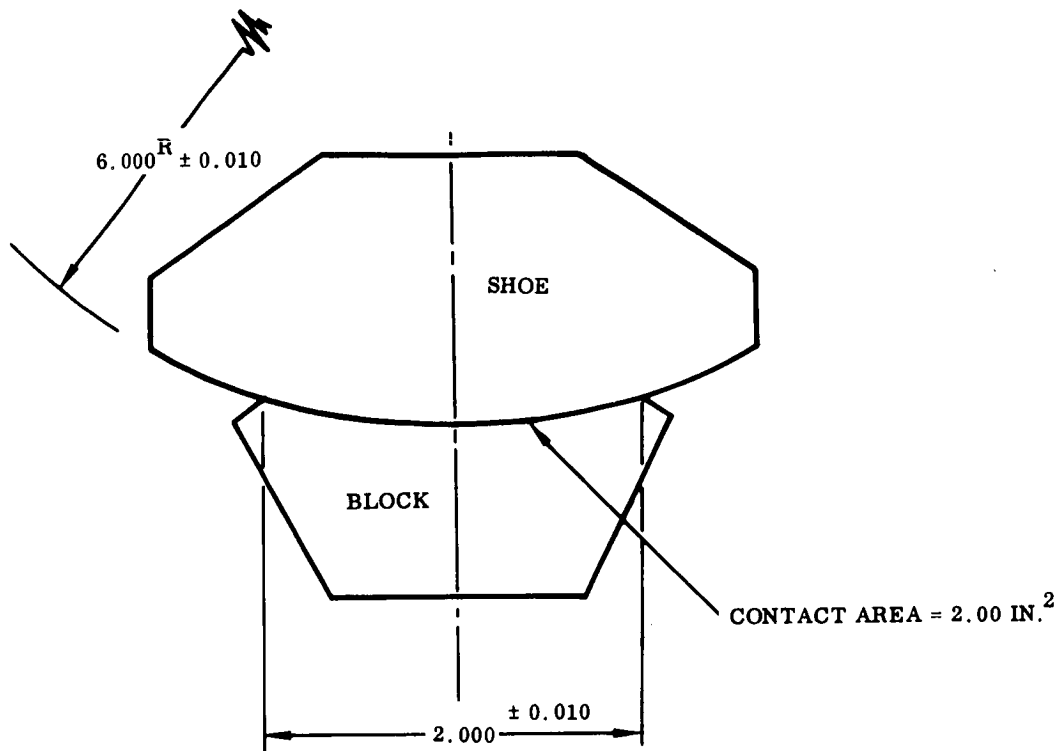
BALL JOINT TEST SPECIMEN CONFIGURATION AND DIMENSIONS
